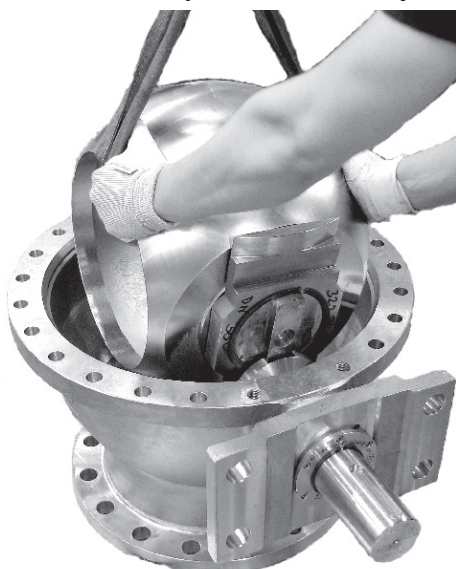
Lifting the ball with the valve in closed position - here with the valve on a work bench. It can also be done with mounted actuator and the body (1) mounted in the pipework.
